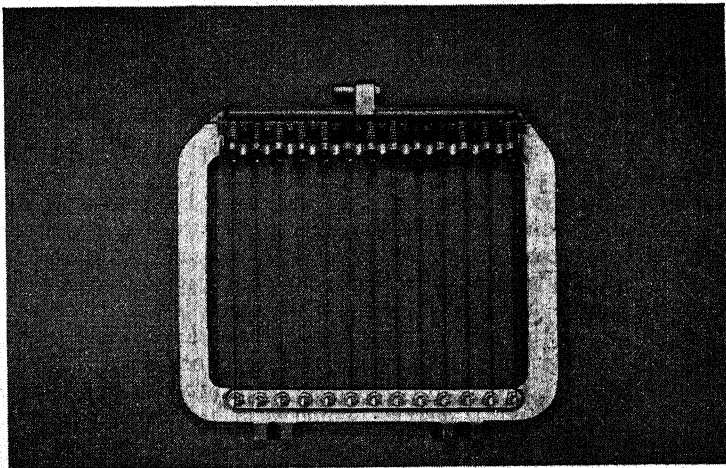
Cast aluminum knife which was redesigned for arc welded steel construction. (See Fig. 2).
